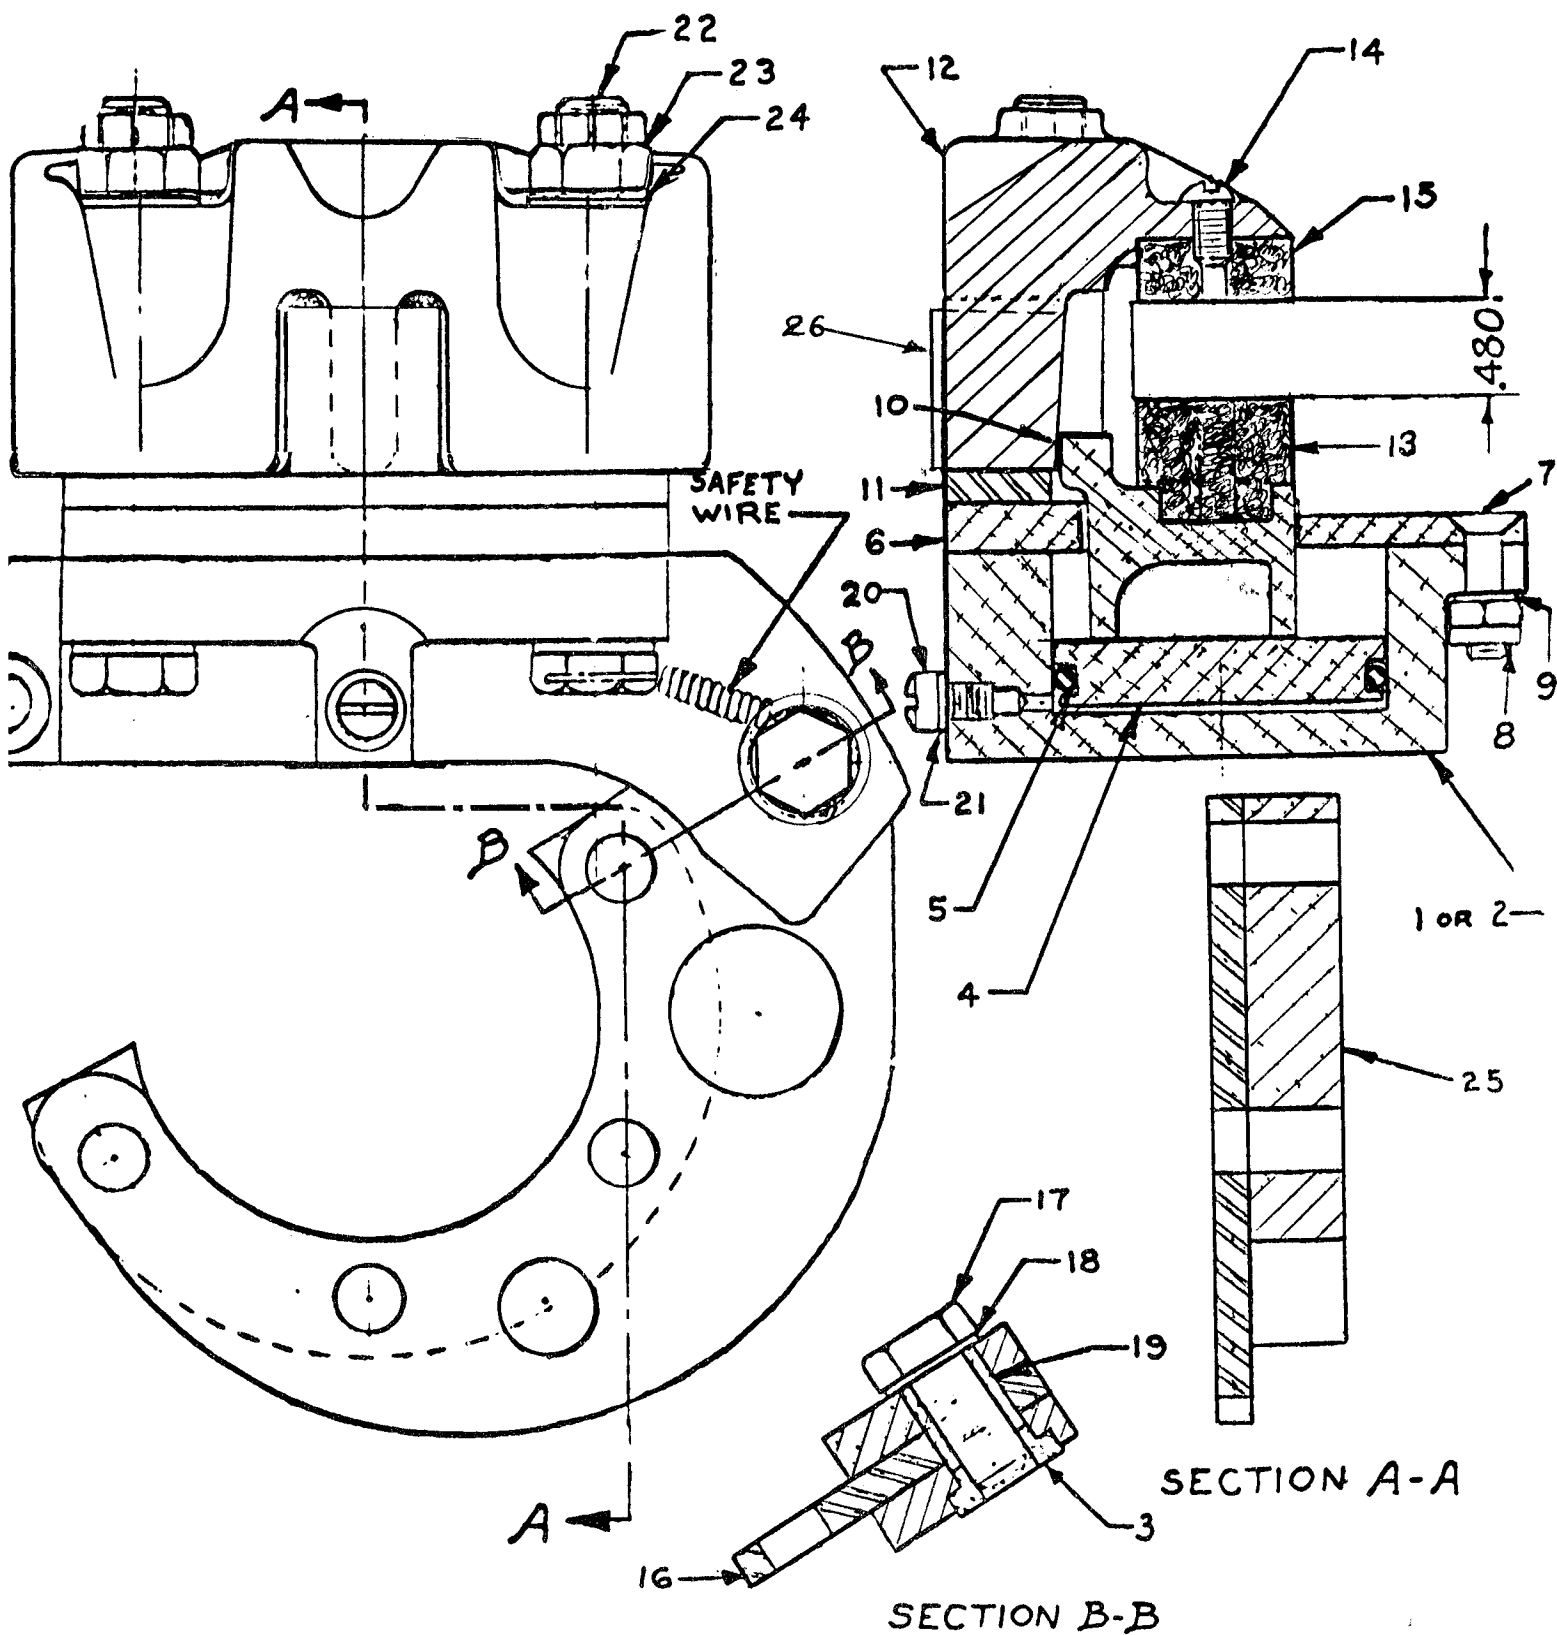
Brake Assemblies 95-300001-5 LH* and 95-300001-6 RH
